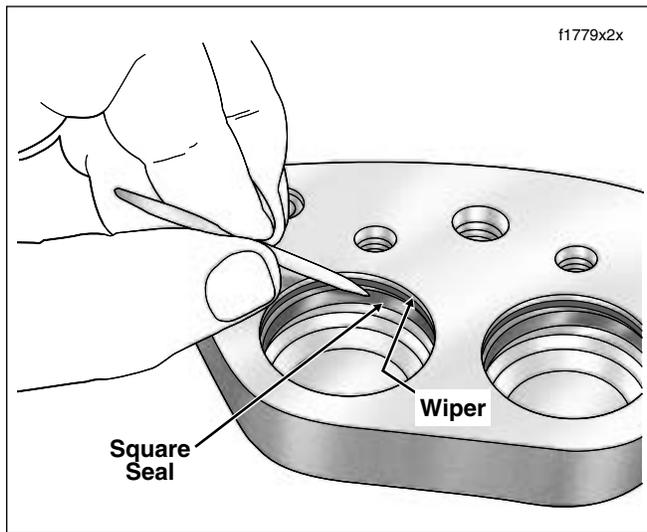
Remove Wipers and Square Seals From Piston Bores
